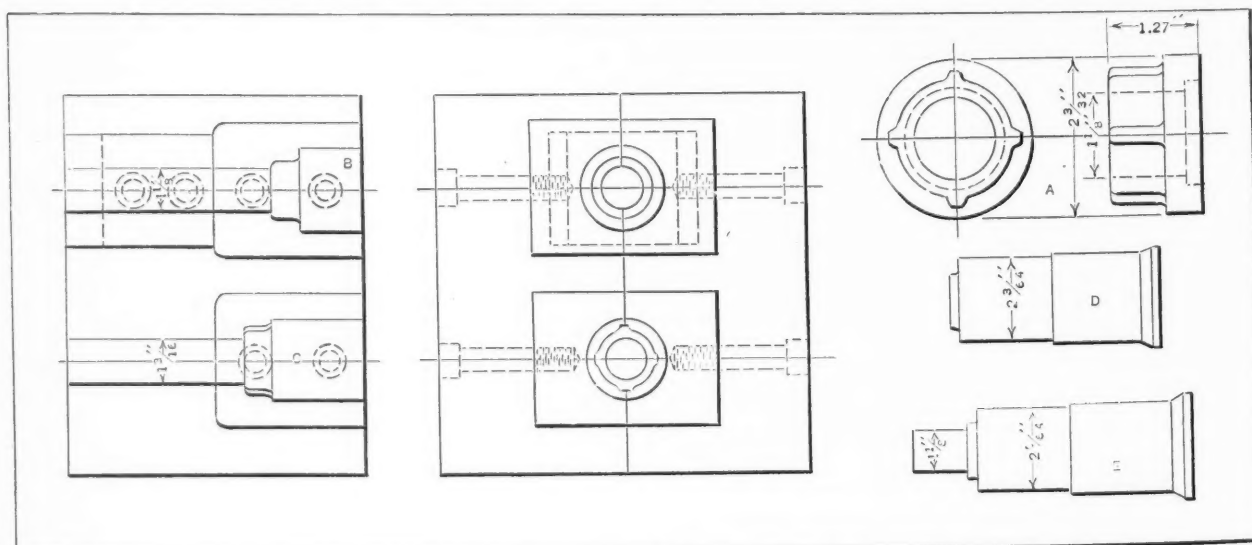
Construction of the Dies and Tools Used in Forging the Female Part of the Pipe Union
